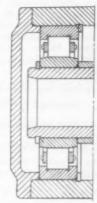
Bearing scheme with cylindrical roller bearing on hollow shaft
